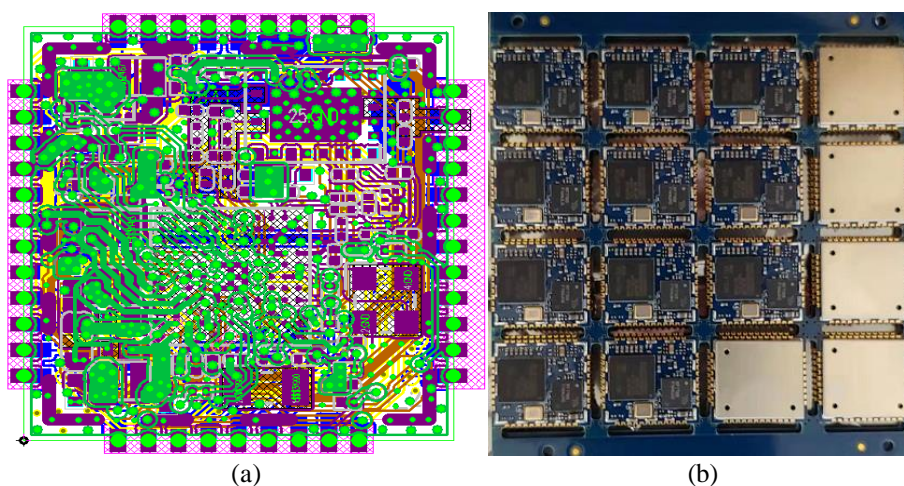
The developed MTK2503-based GPRS modules’: (a) PCB layout; (b) joint board.
